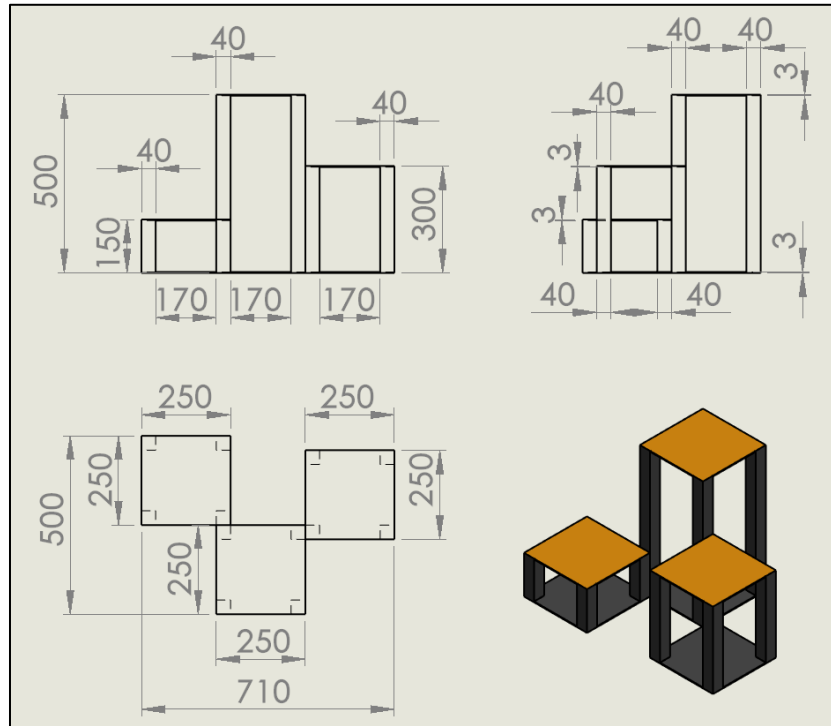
19: Technical drawing of the platform where the artificial reef creation objects will be placed (in millimeters)
